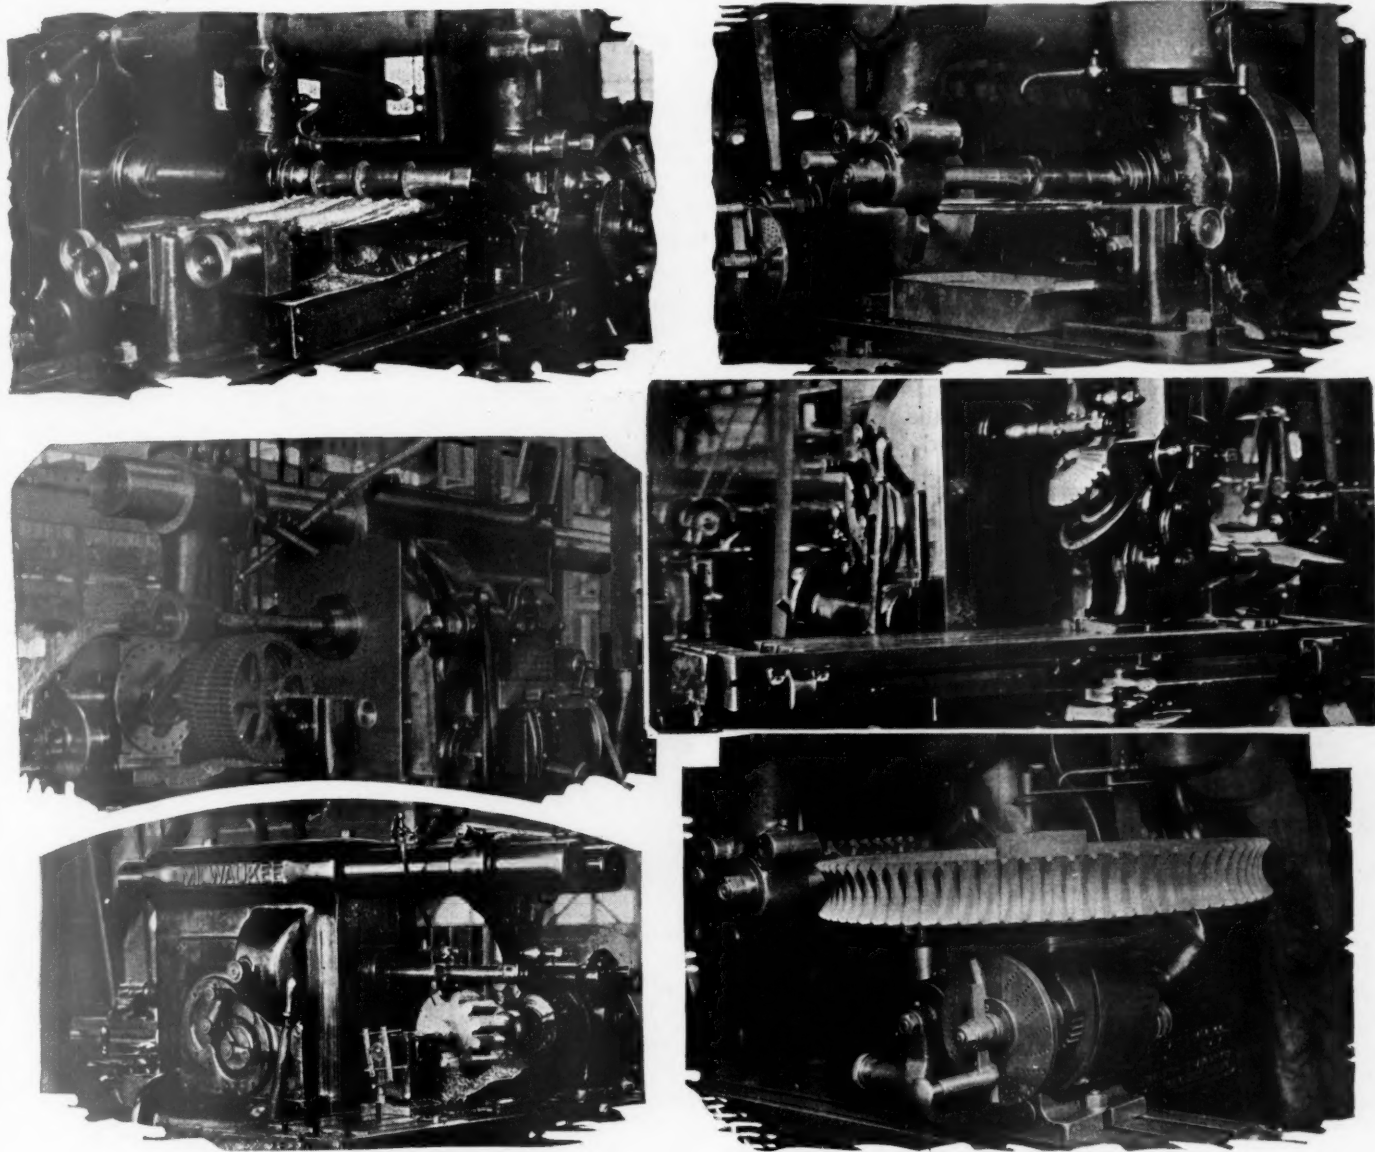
Various types of jobs performed on milling machines in the railroad toolroom
